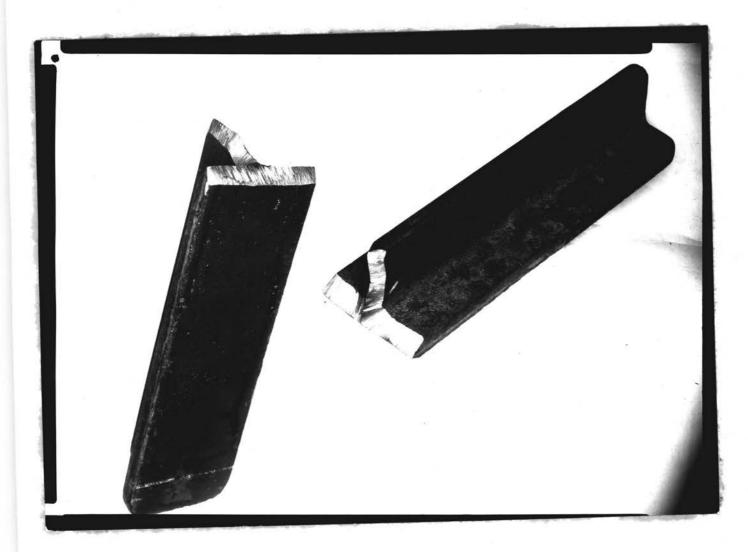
One of the beams as prepared for welding. The correct angle of 120° can be seen on each fractured end of the broken beam.
